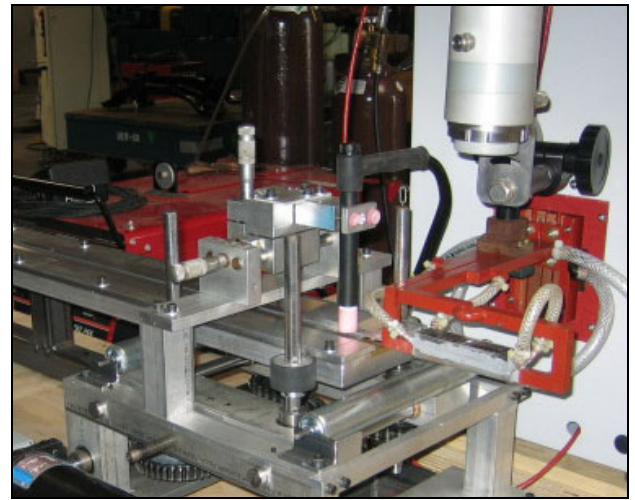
Seam Weld/Cooling-Control test apparatus.
